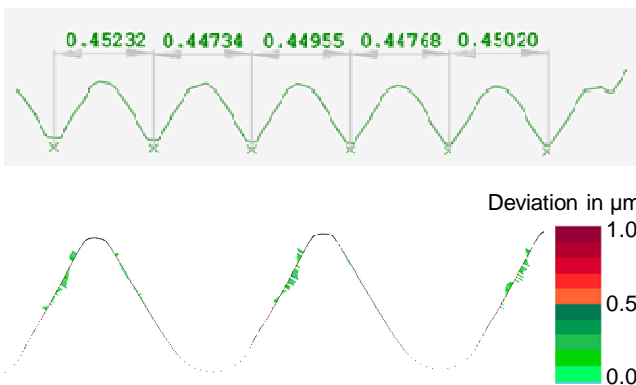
Measurement results on an M2.6 thread gauge: Top: Thread pitch, Bottom: Tooth profile deviation.
